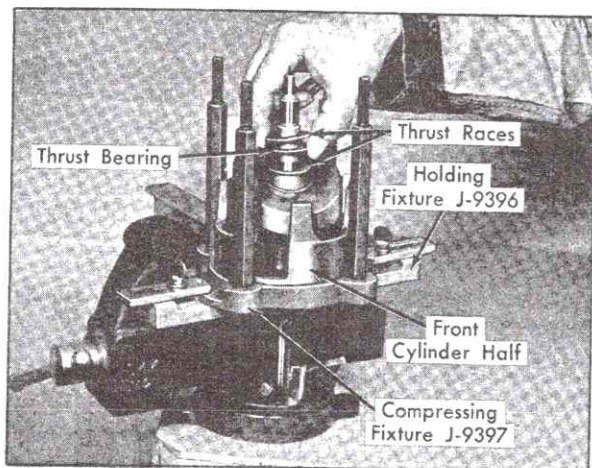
Installing Rear Thrust Races & Thrust Bearing
